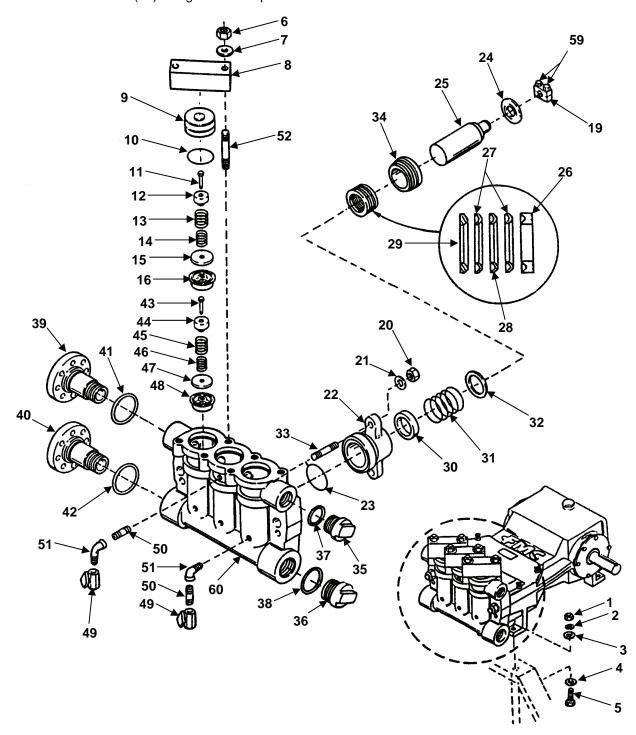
High Pressure Pump (Fluid and Valves) (Sheet 1 of 2).
